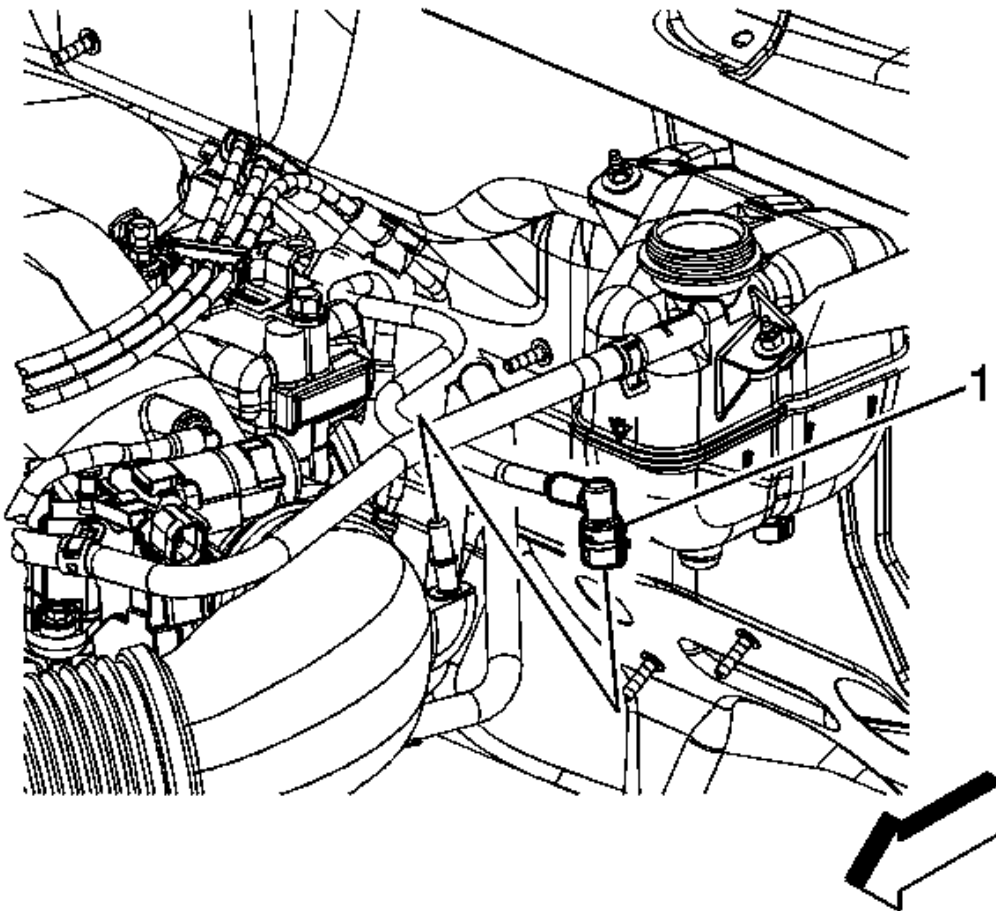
Identifying PCV Fresh Air Tube (at Air Cleaner Outlet Duct)
